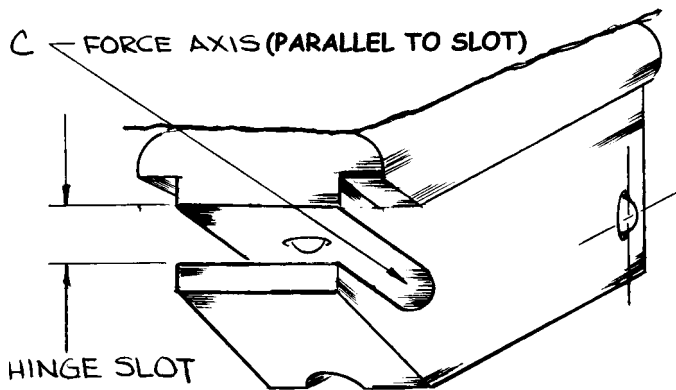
Typical Blade Engagement/Disengagement Force Axis
